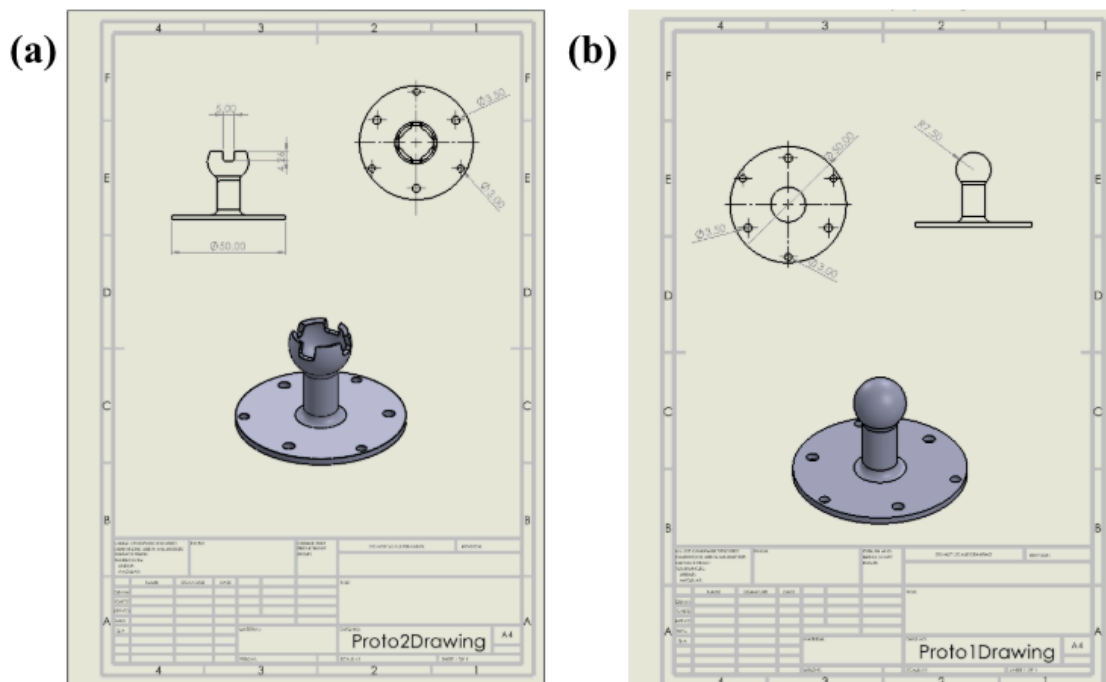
a) CAD model for socket joint; b) CAD model of ball joint.
